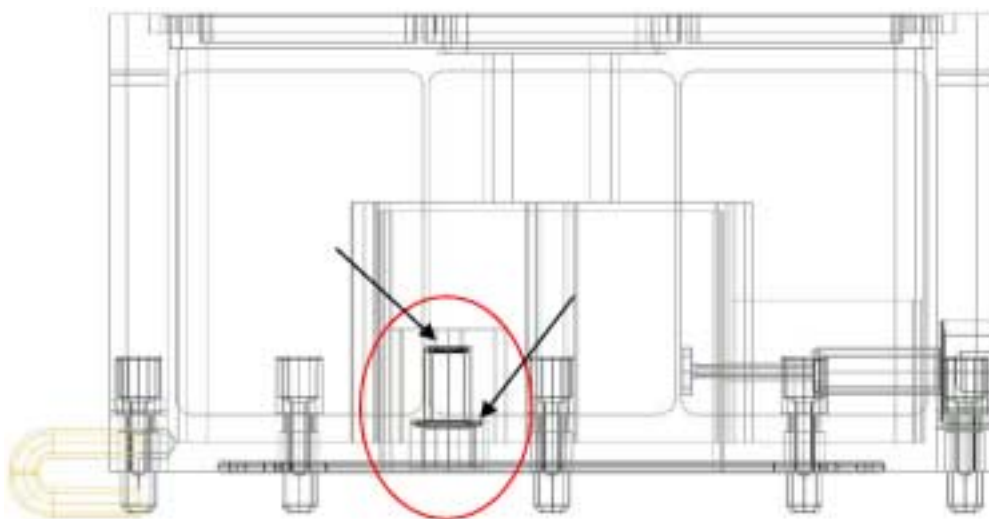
Detail view of the M8 screw. The arrows are showing the two o-rings.
